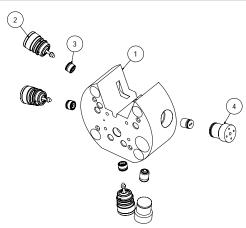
79103-01 Single Purge Valve Manifold Disassembly
